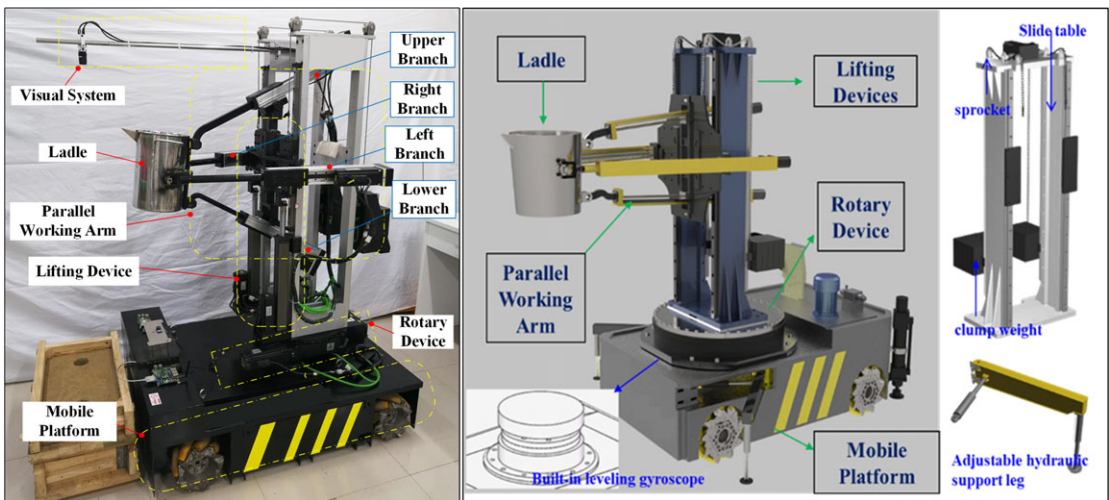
Integral mechanism model of pouring robot (a). Prototype machine. (b). 3D modeling.
